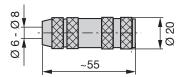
Connector BKS-S103-00 (socket) for BUS IN
